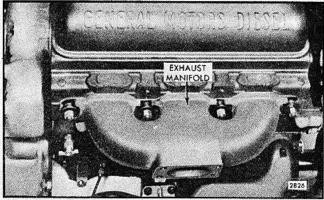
Typical Cast Air - Cooled Exhaust Manifold Mounting
